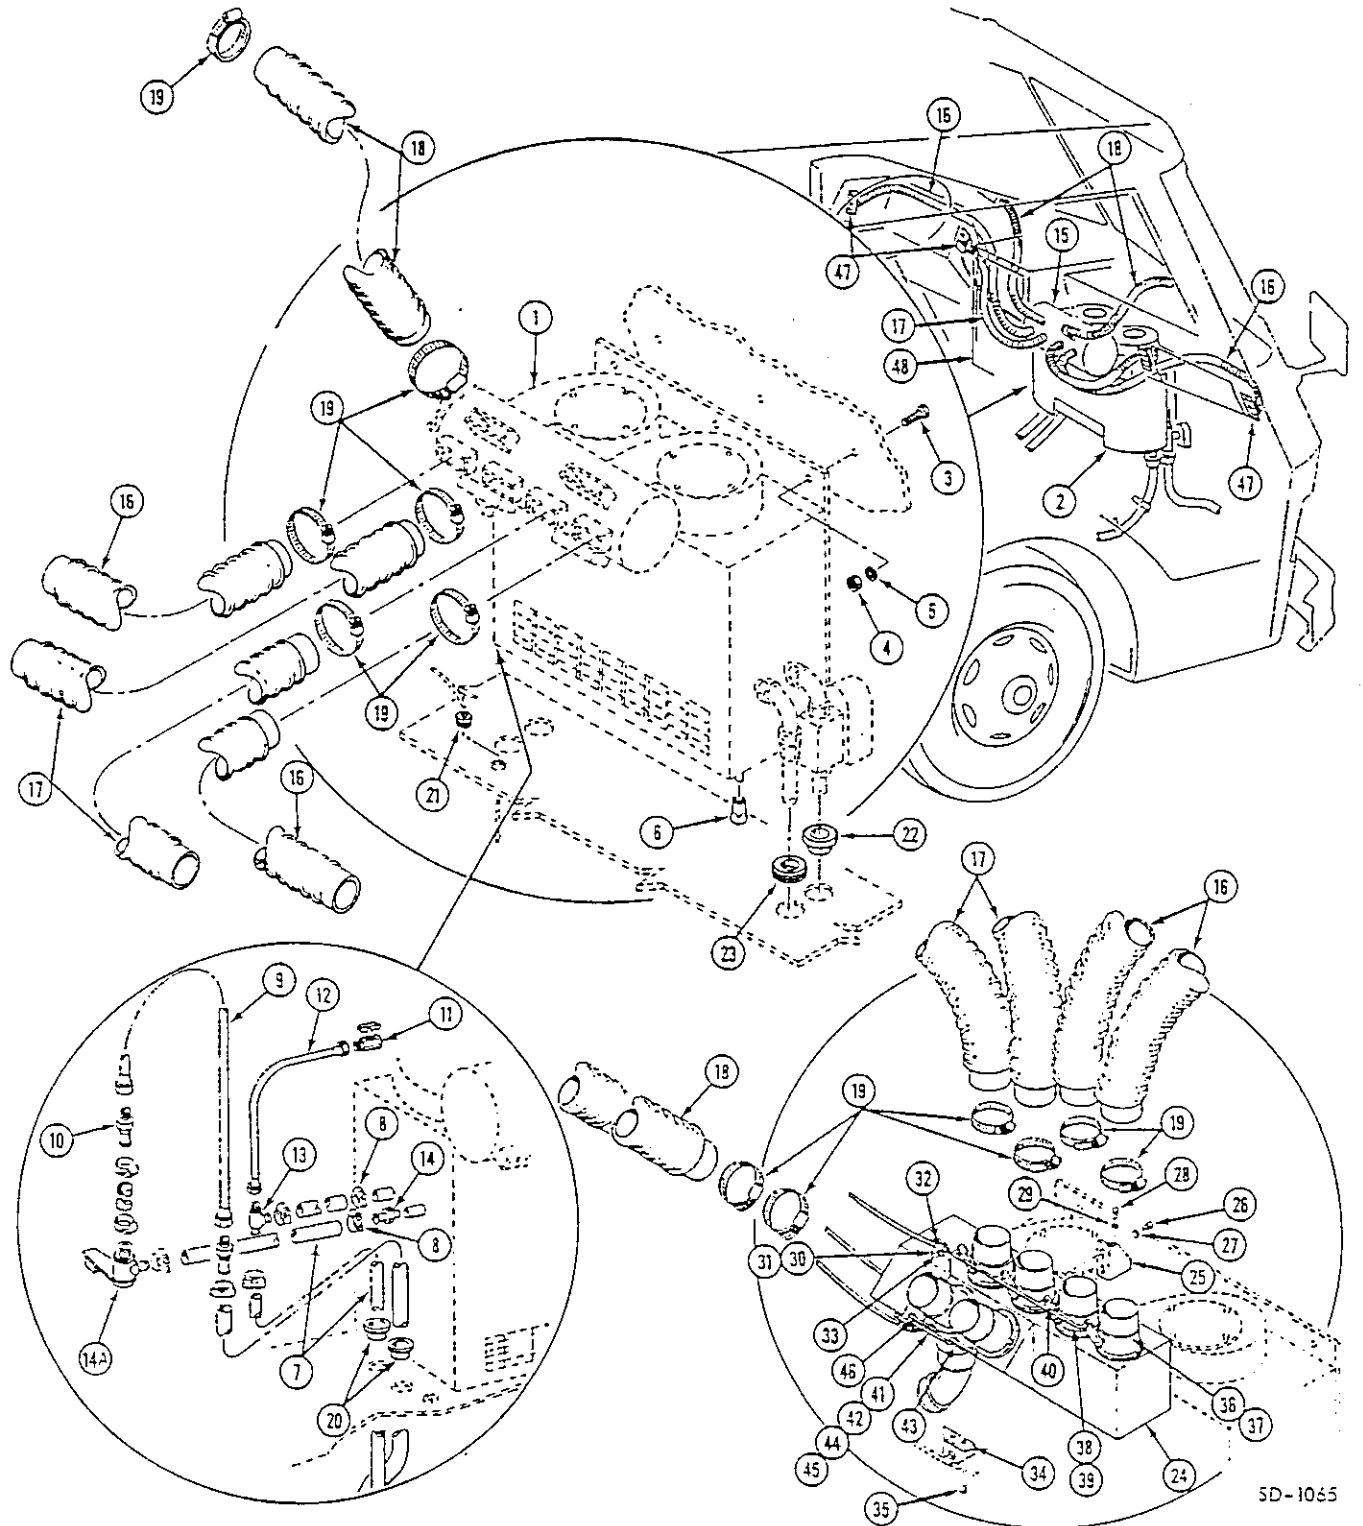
Heater Cooler Unit and Distribution Tube - Automotive Air
